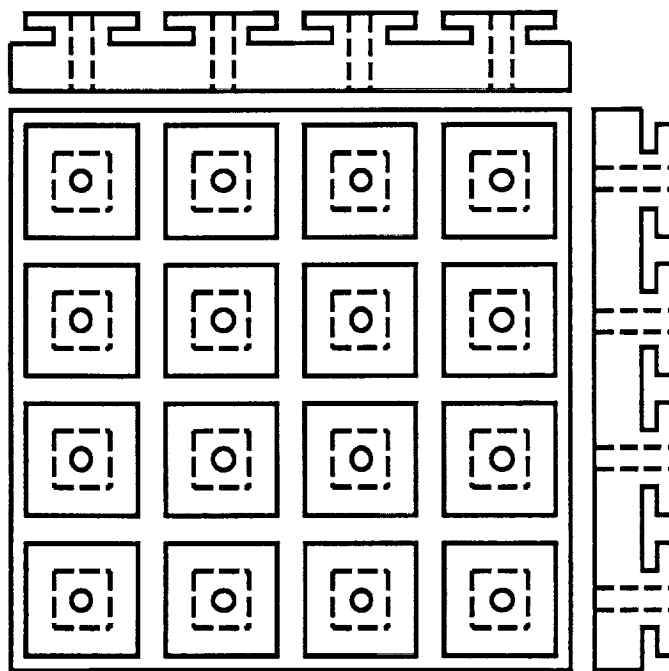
UNIT TILE OF THE 2-STEP MACHINE BED
